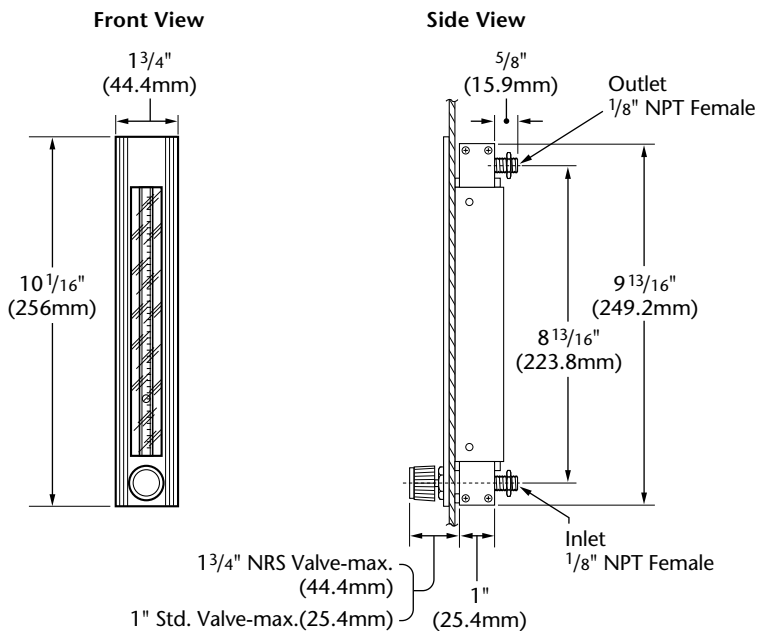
Series 150 Single Tube Flowmeter Dimensions with Optional Aluminum Bezel (FM 4710)
